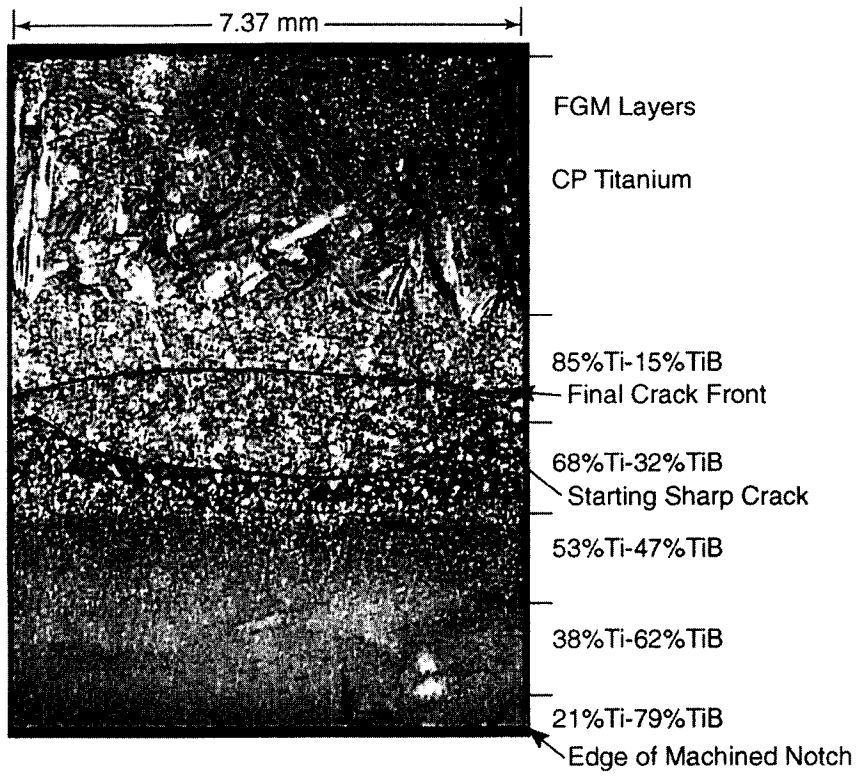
Ti/TiB FGM fracture surface.
